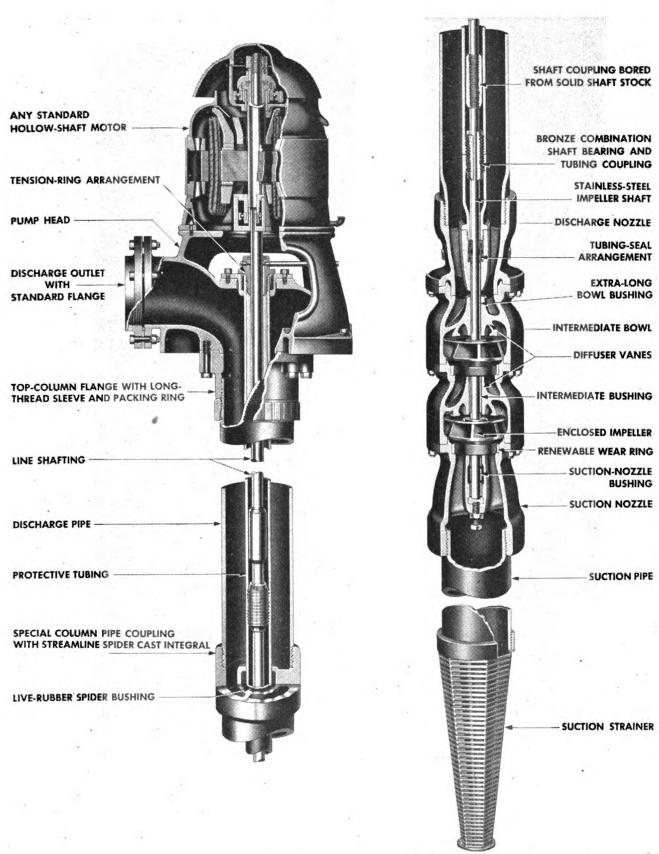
Inclosed-impeller deep-well pump, oil lubricated.
